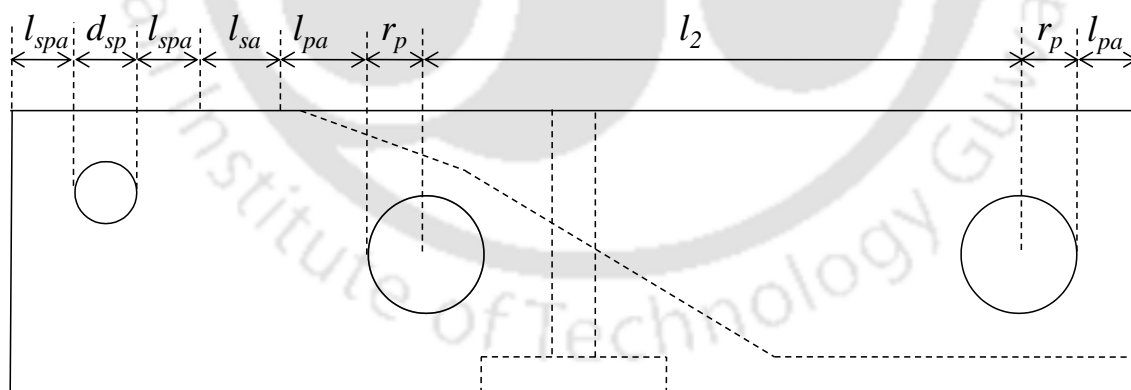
Different dimension and clearance of right hand view of the bottom part of the knee joint
